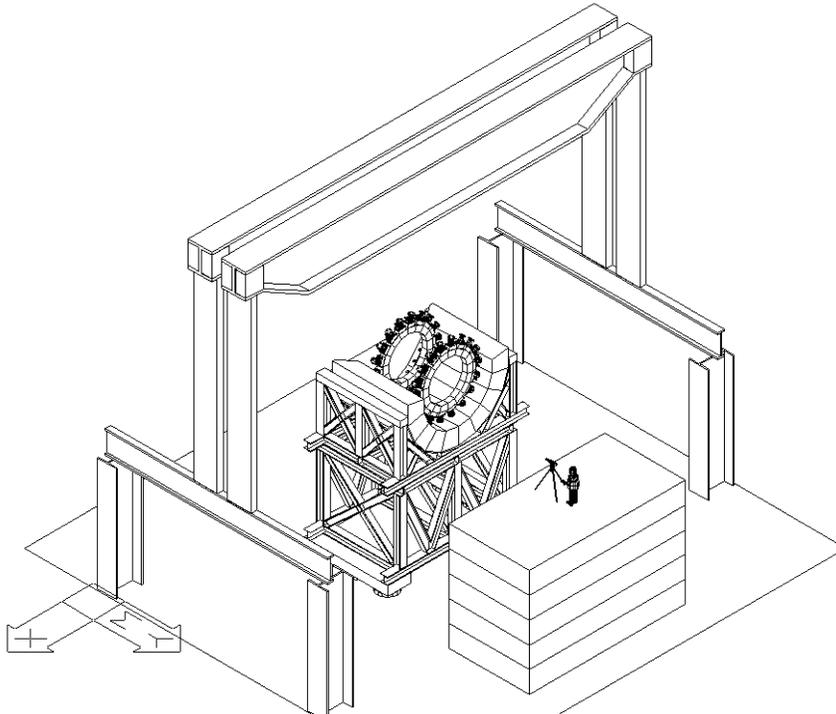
CMS HCAL barrel assembly / installation step 5.
